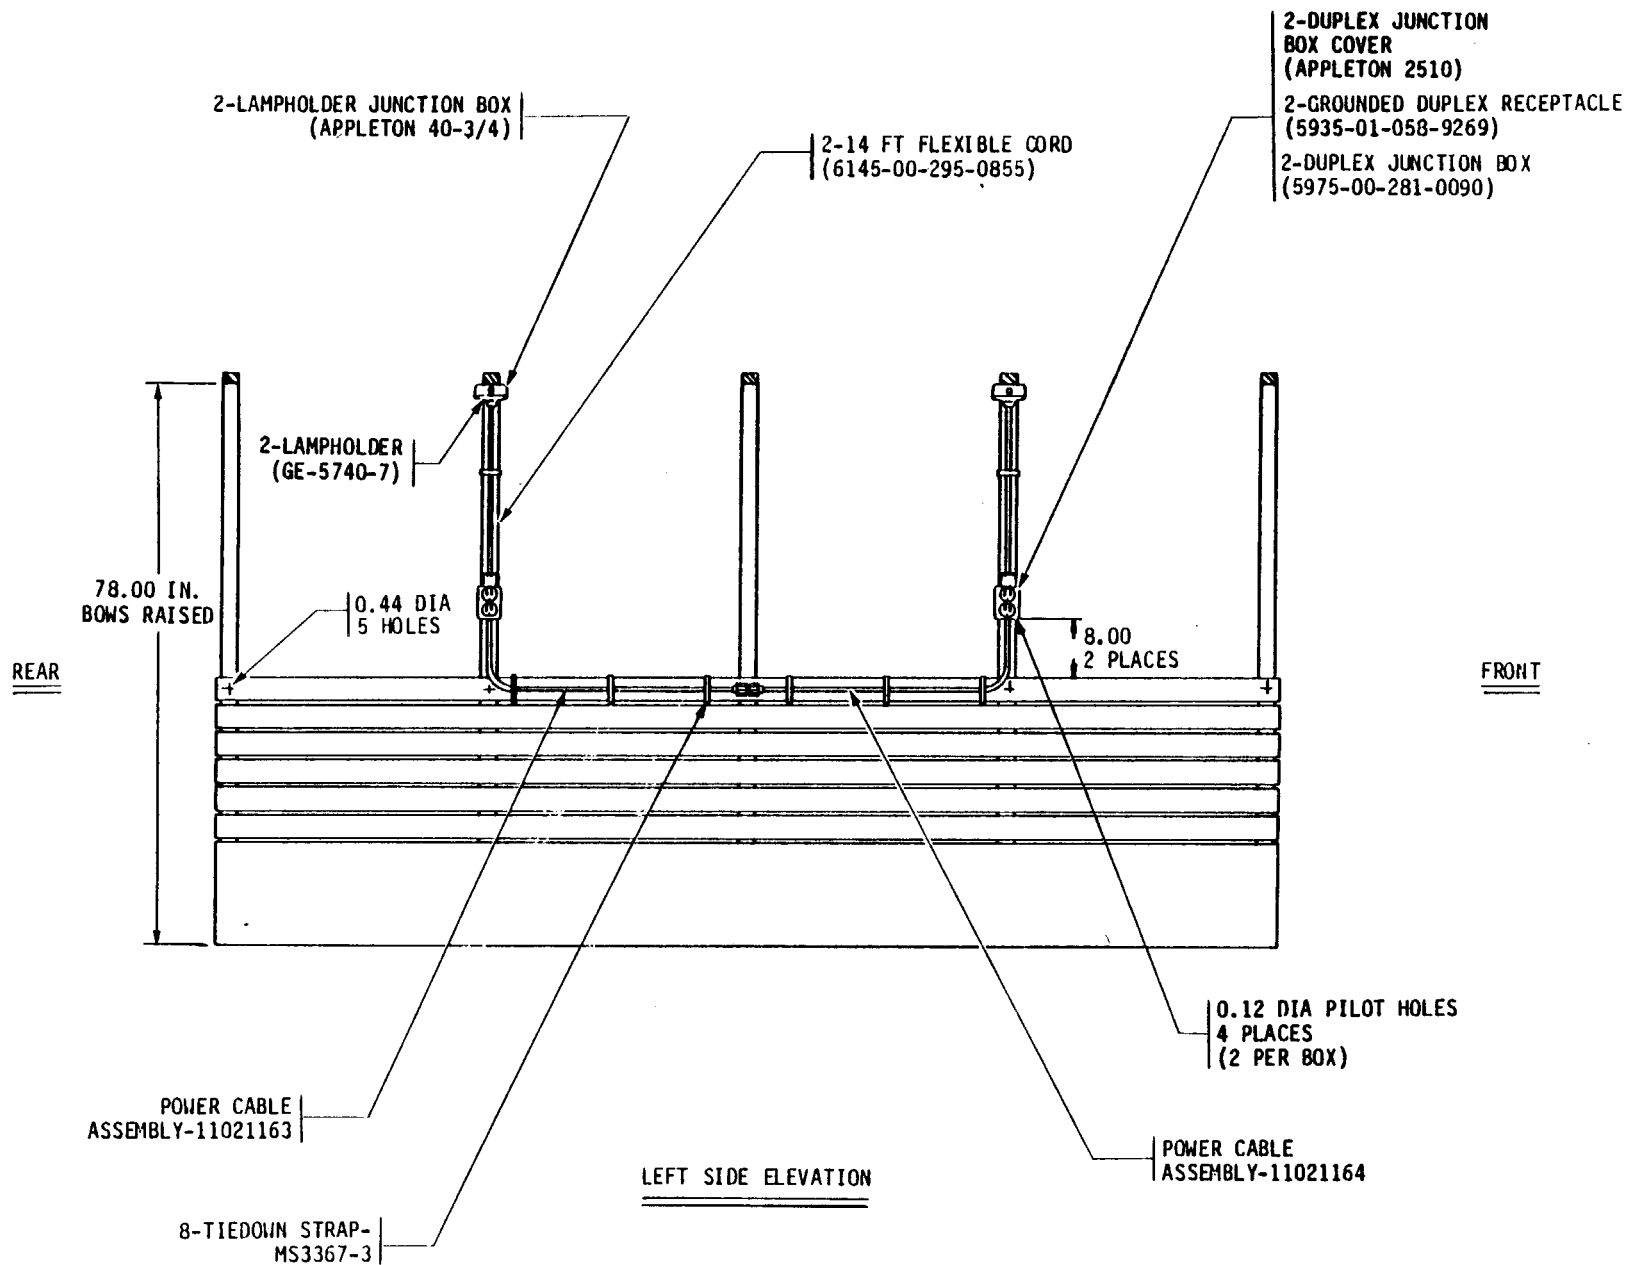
Dimensions for components to be mounted, unit 2, M35A2, left side elevation.
